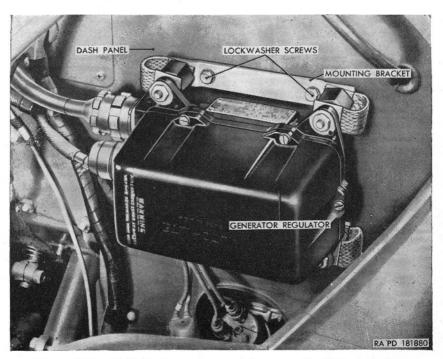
(Added) Generator regulator assembly M170-installed.
